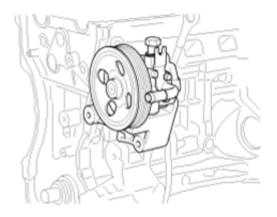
Identifying Power Steering Pump & Bracket Courtesy of KIA MOTORS AMERICA, INC.
